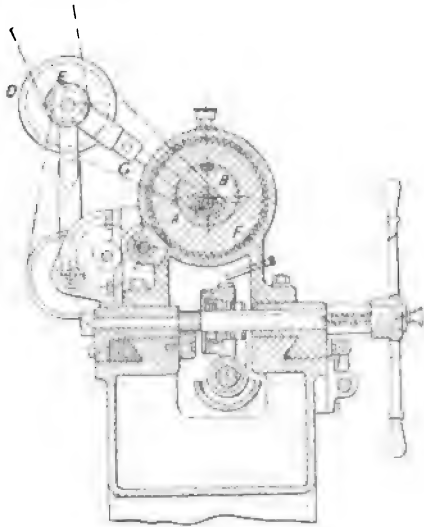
CROSS SECTION AND END VIEW OF FIG. 4
